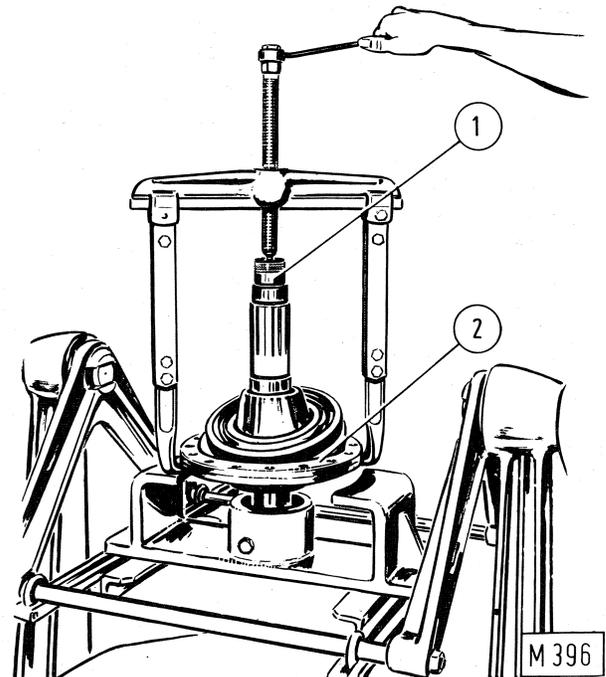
Removal of front end plate (2) from shaft (1).
